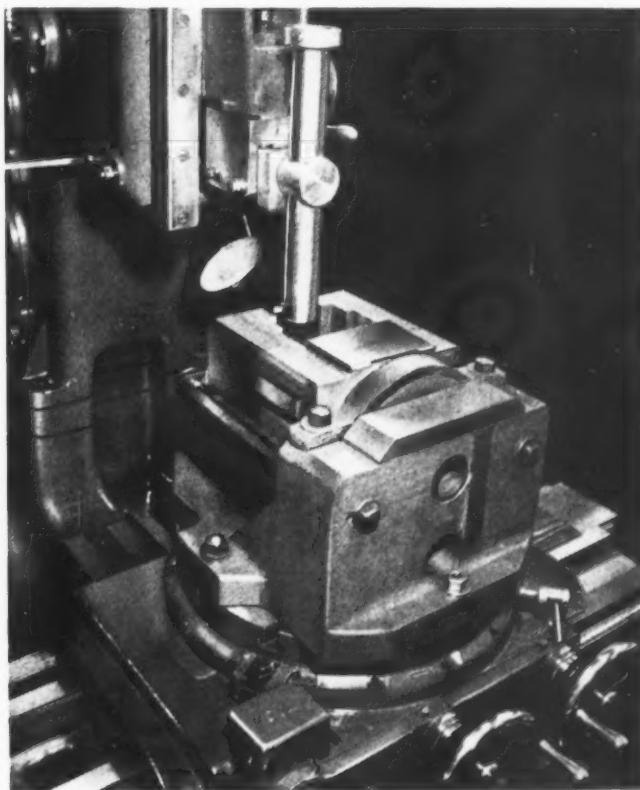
Machining the Multiple Number of Recess Surfaces in a Breech Ring on a Vertical Shaper
